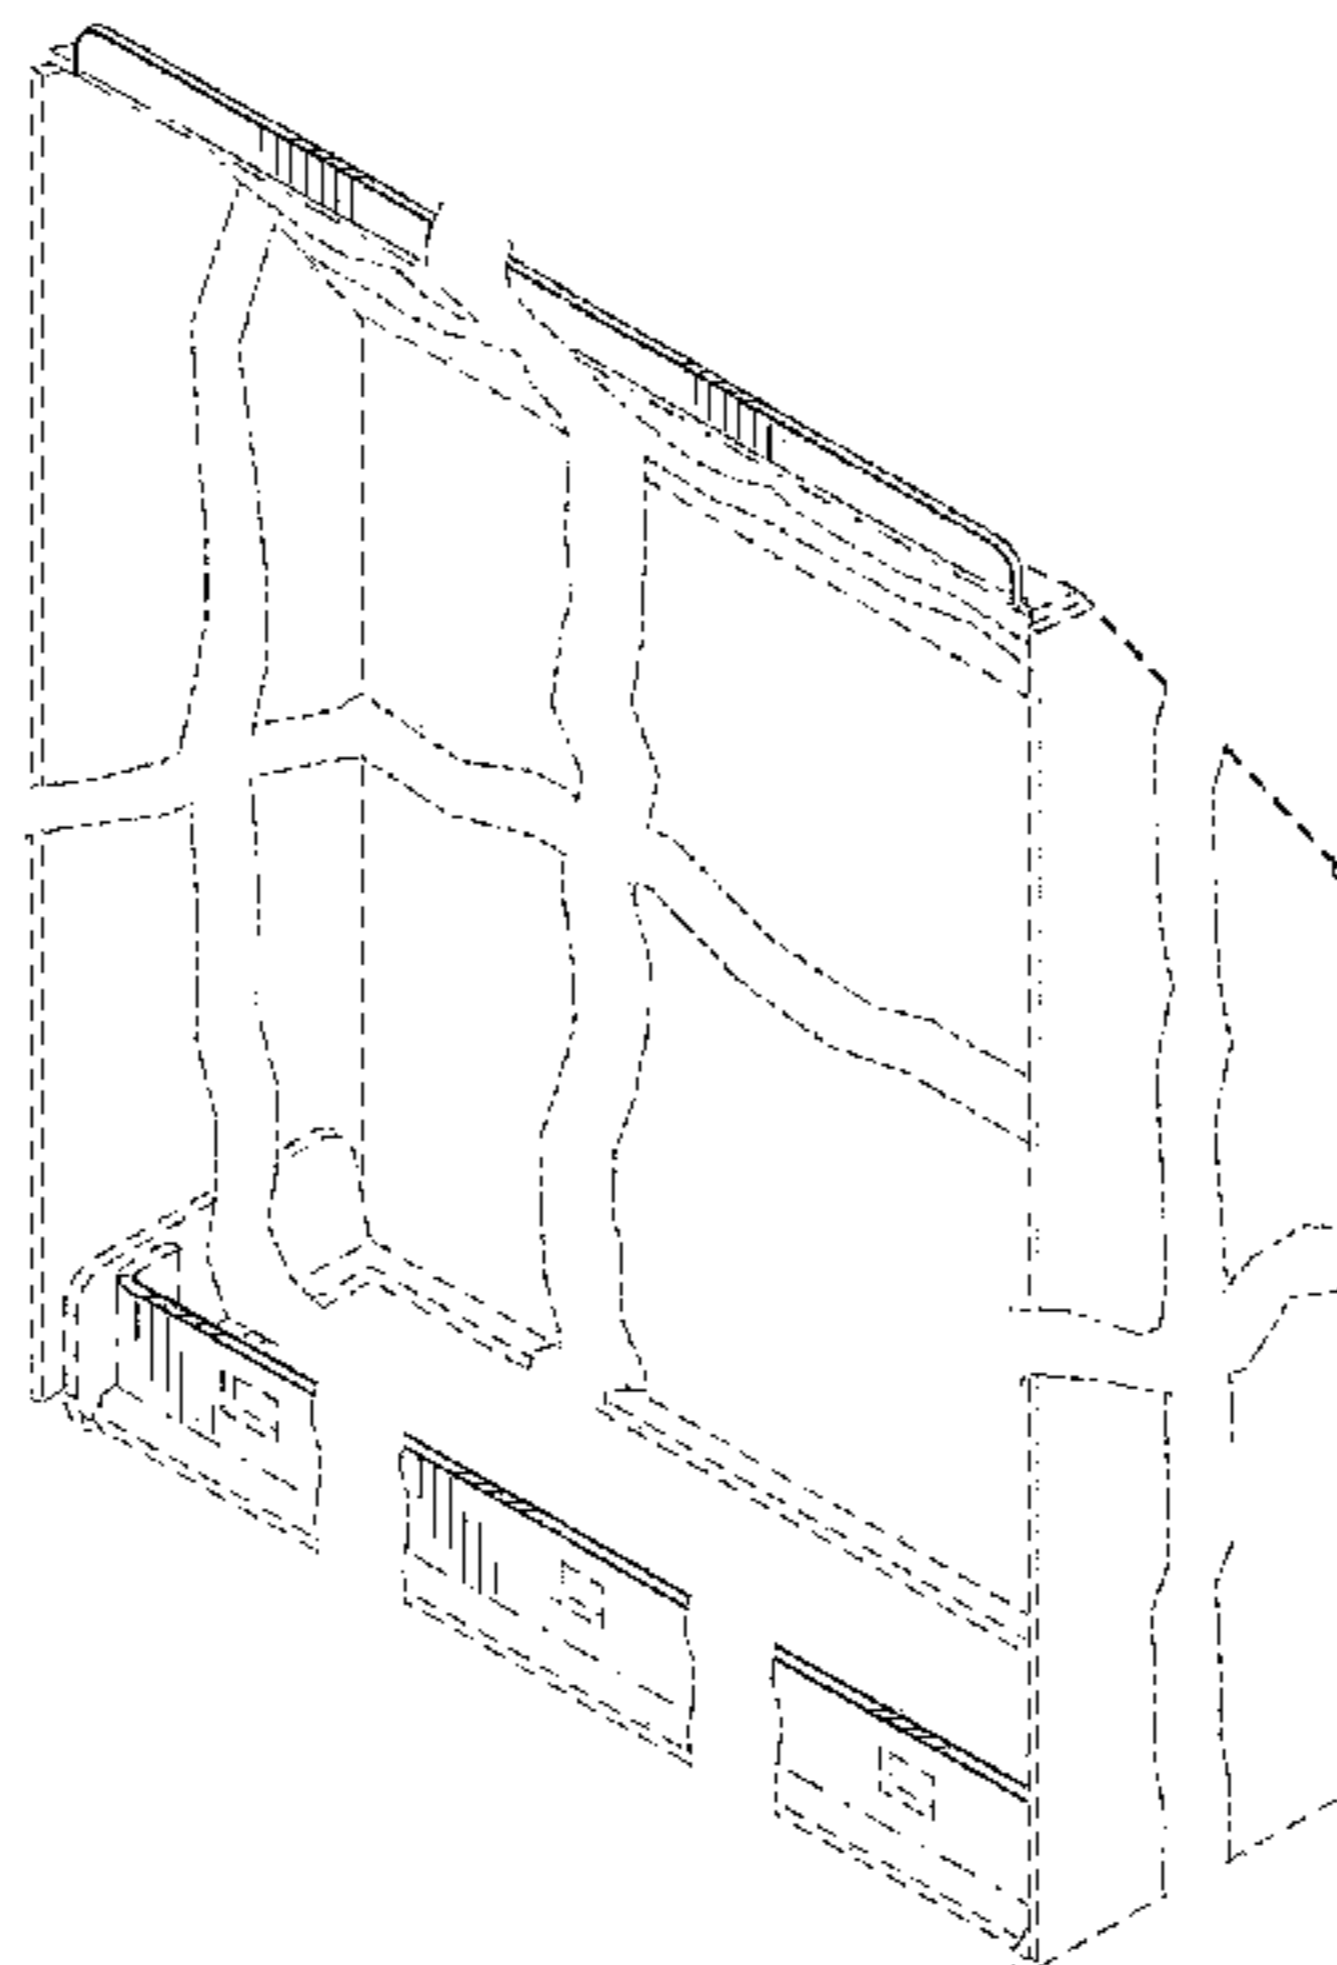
is a top, rear, right isometric view of a fan shroud; FIG. 2 is a front elevational view of the fan shroud of FIG. 1; FIG. 3 is a left side elevational view of the fan shroud of FIG. 1; FIG. 4 is a bottom plan view of the fan shroud of FIG. 1; FIG. 5 is a top plan view of the fan shroud of FIG. 1; and, FIG. 6 is a rear elevational view of the fan shroud of FIG. 1.
